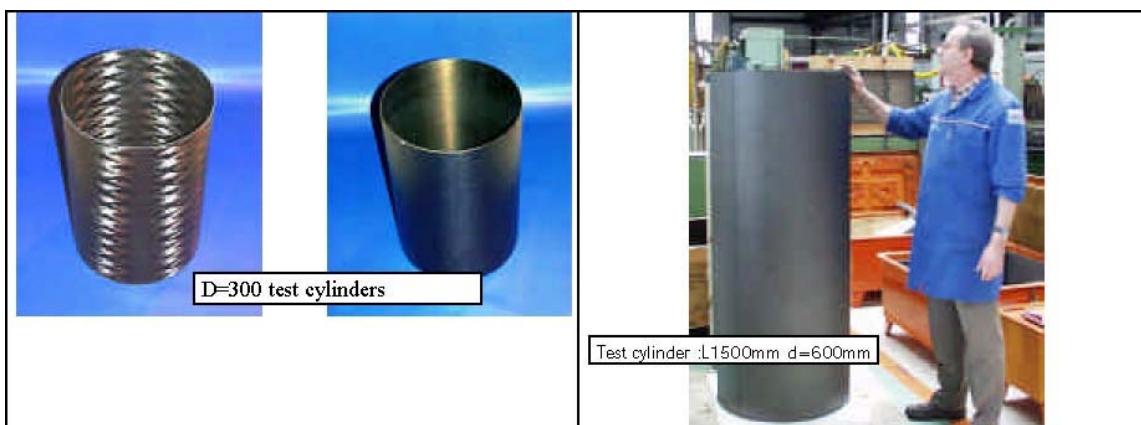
Carbon-carbon composites: Test cylinders
